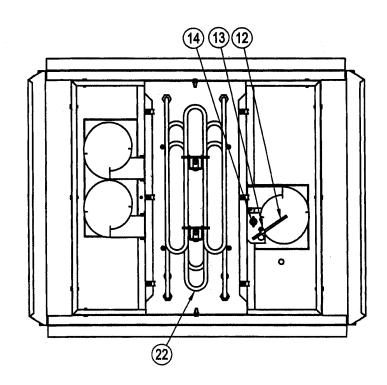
; Bottom of Hot Unit, Cover Removed (For parts description, refer to page 10)
